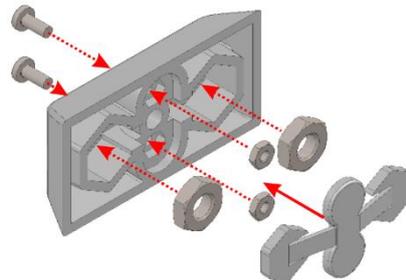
Assembly diagram of the components of the Mounting Mechanism
